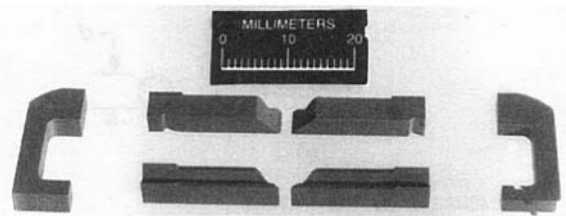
Disassembled fiducial flags, showing an extra pair of wedge parts for detail
